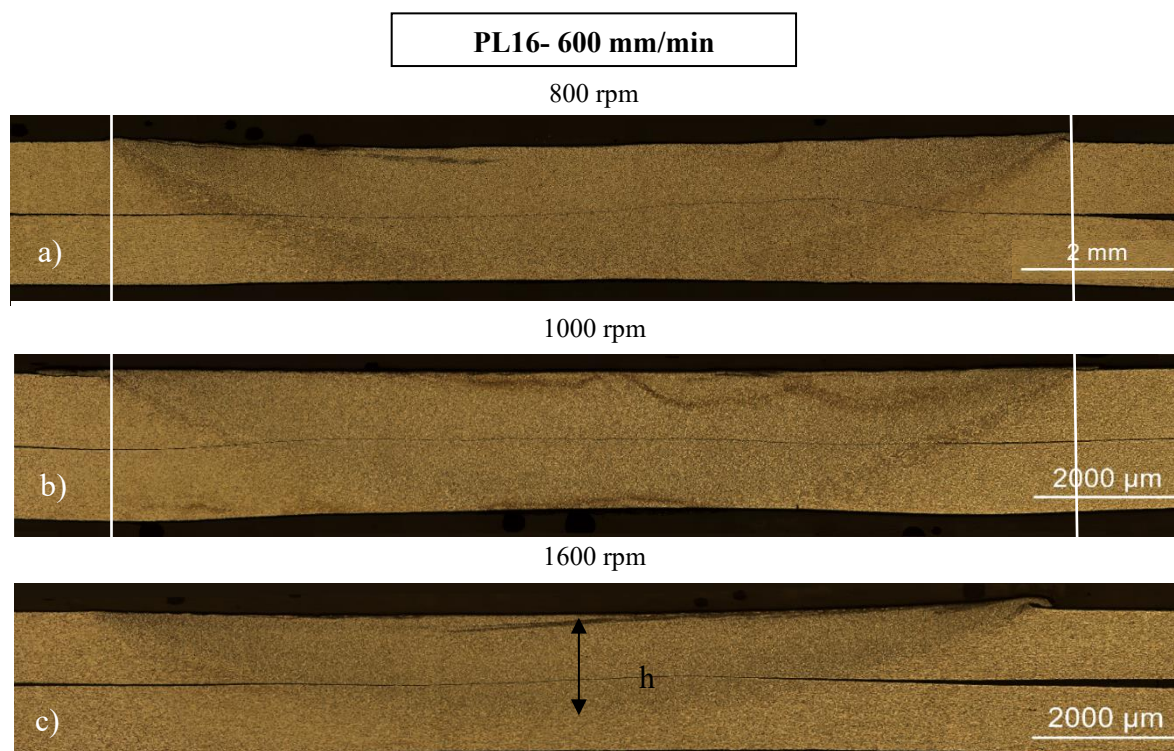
Cross-sections of the welds manufactured with PL16 tool, 600 mm/min and varying the rotational speed.
